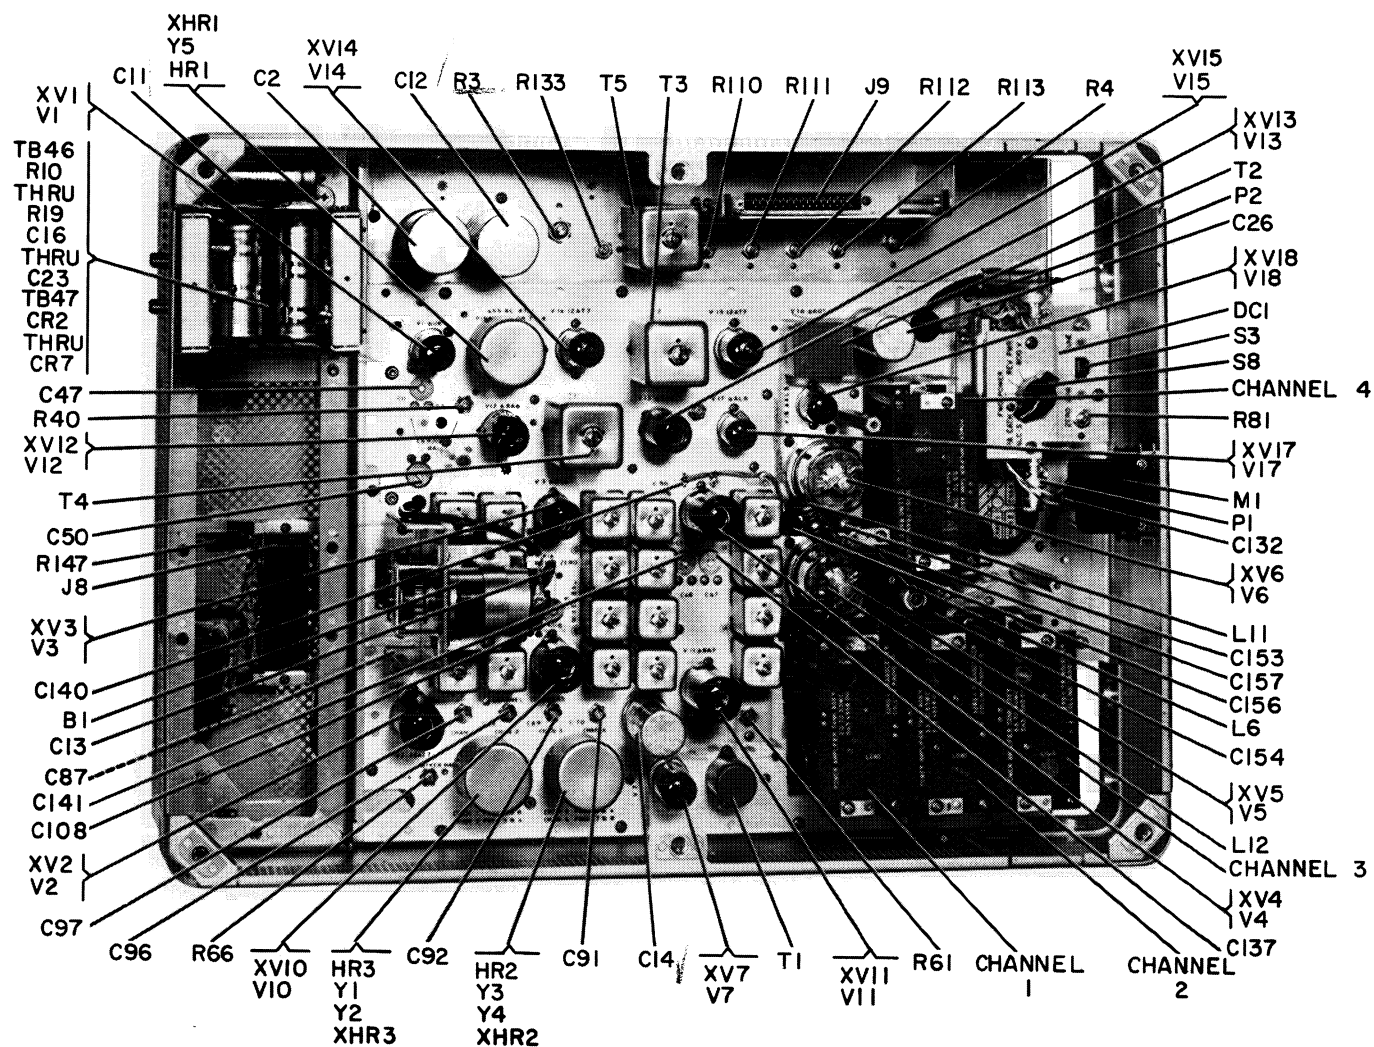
32MS-1A, Top View, Cover and Shield Removed, Keyed
